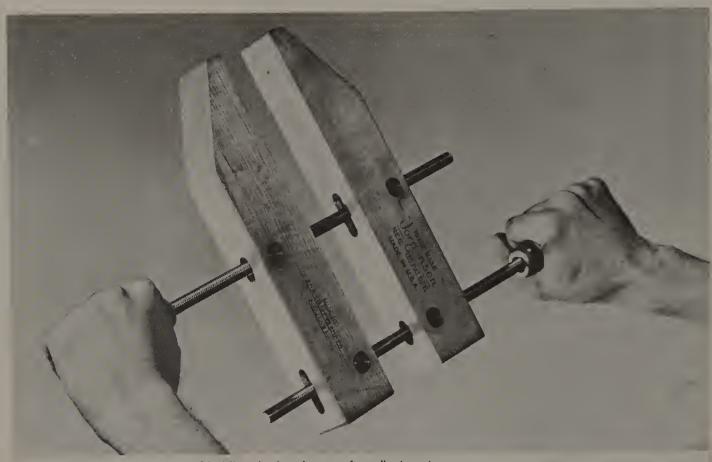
The proper method of holding the hand screw for adjustment.
